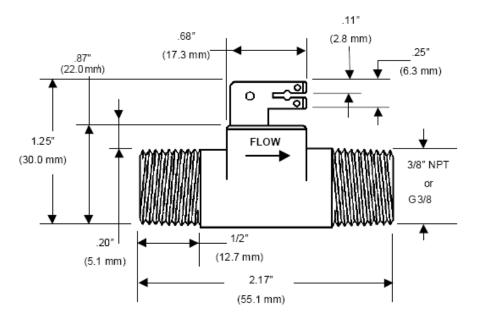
Required Dimensions of the Flow Sensor Component, Model # FTB2004
